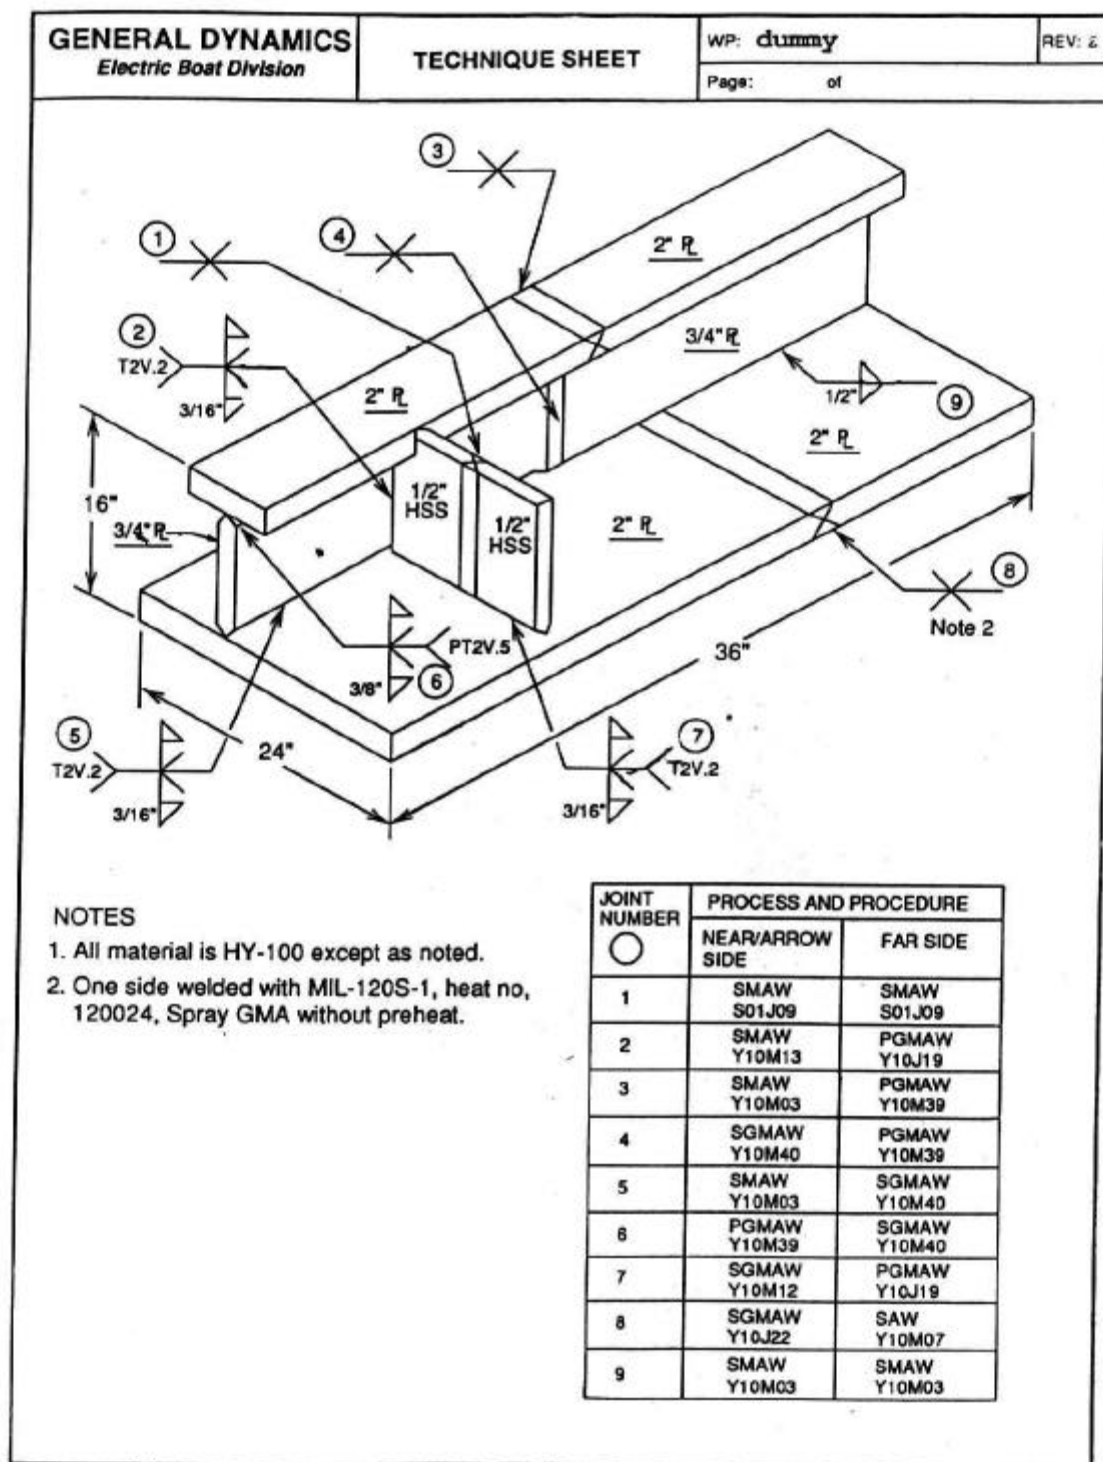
Welding Techniques Used to Fabricate EB Mockup
